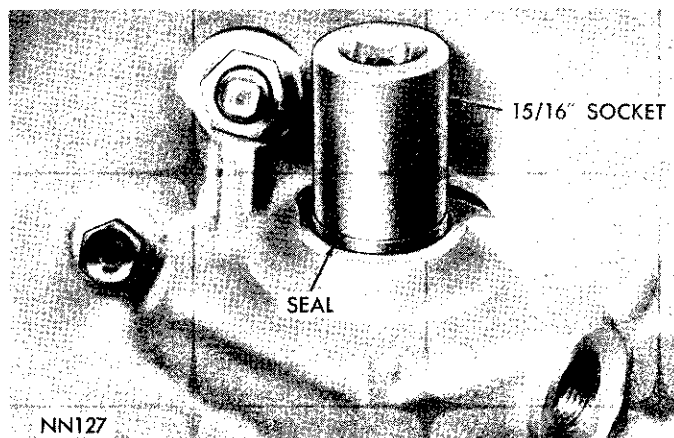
Installing Valve Body Manual Lever Shaft Oil Seal
